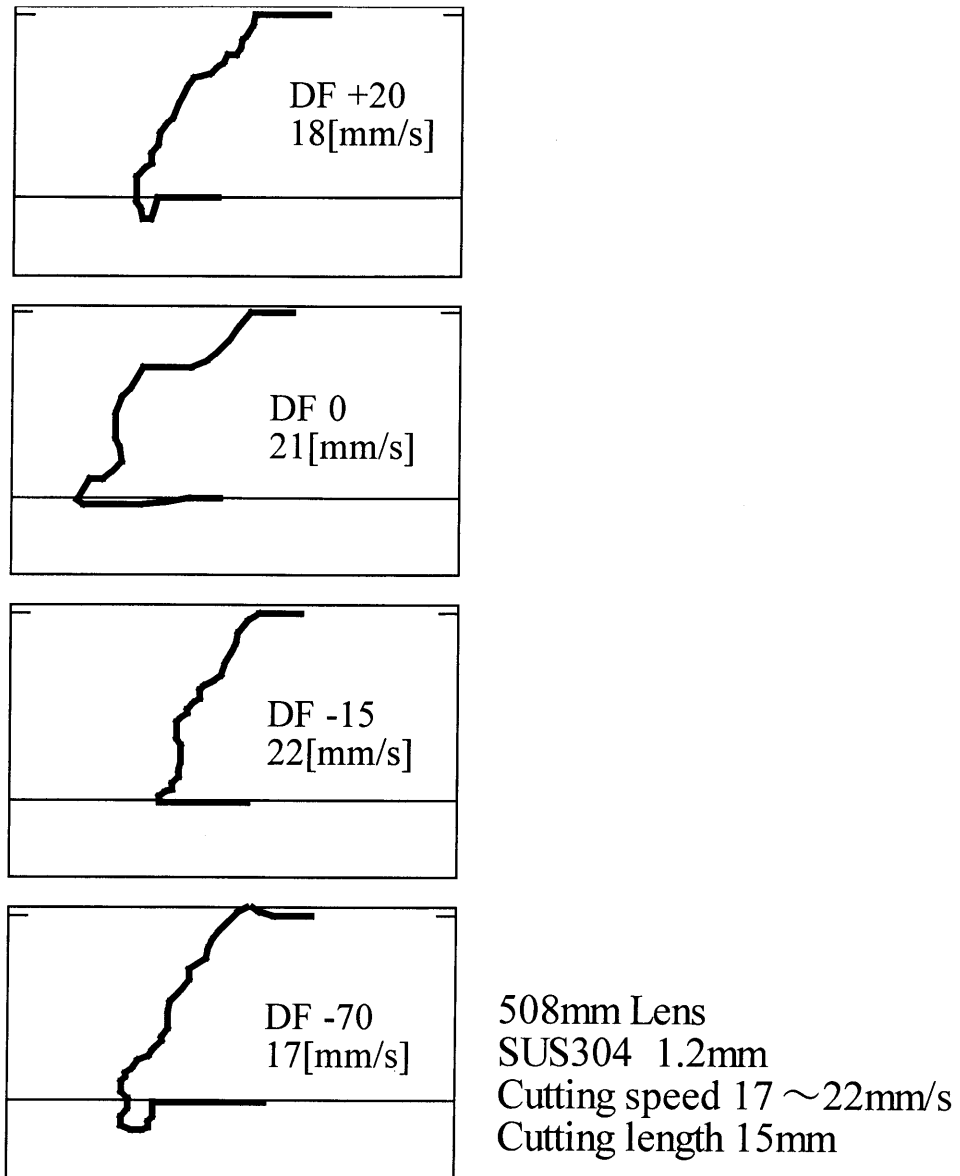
Shape of dragline at 15mm from piercing point
